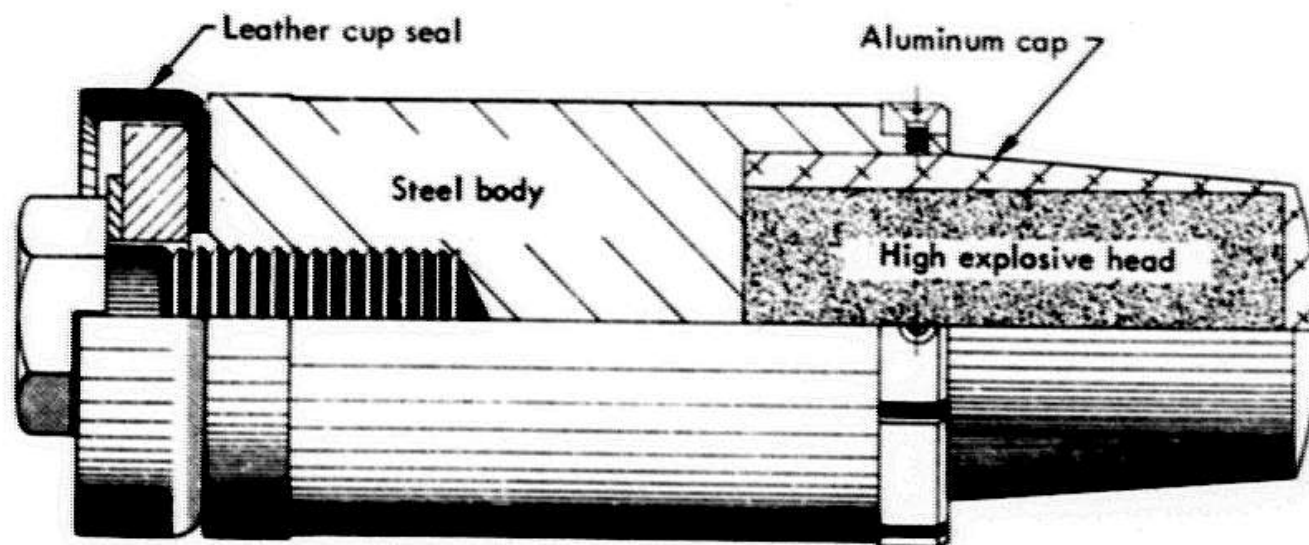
Scaled drawing of the Susan projectile. The high explosive head is 4 in. long and 2 in. in diameter (0.102 m x 0.051 m).
